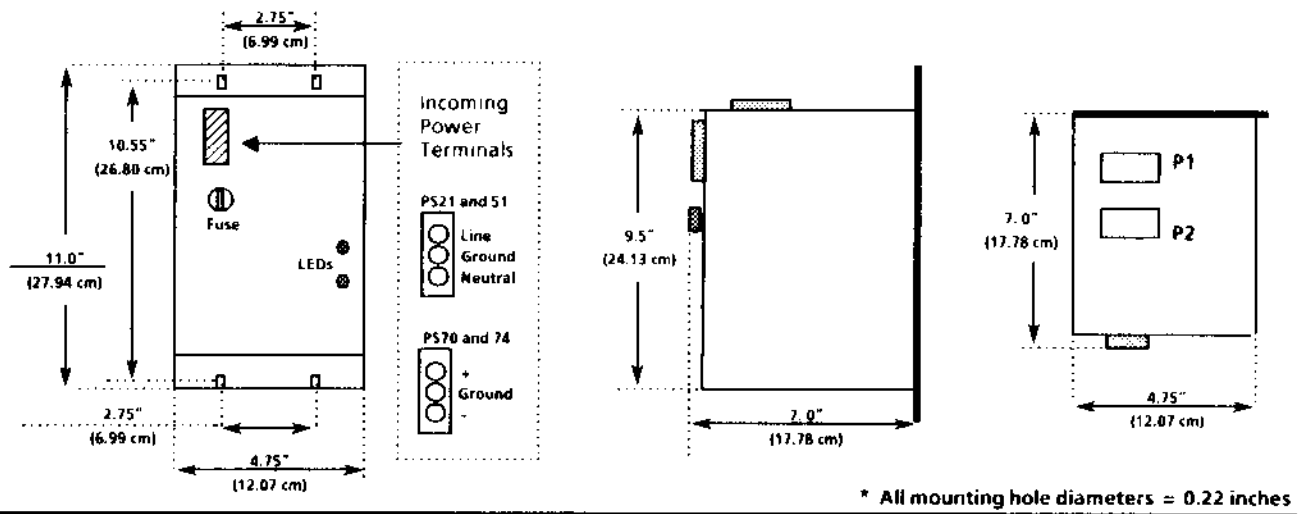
Type PS21, 51, 70, and 74 Dimensions
